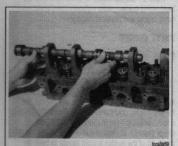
then the camshaft can be removed by sliding it out (shown), or unbolting a bearing cap (not shown)
